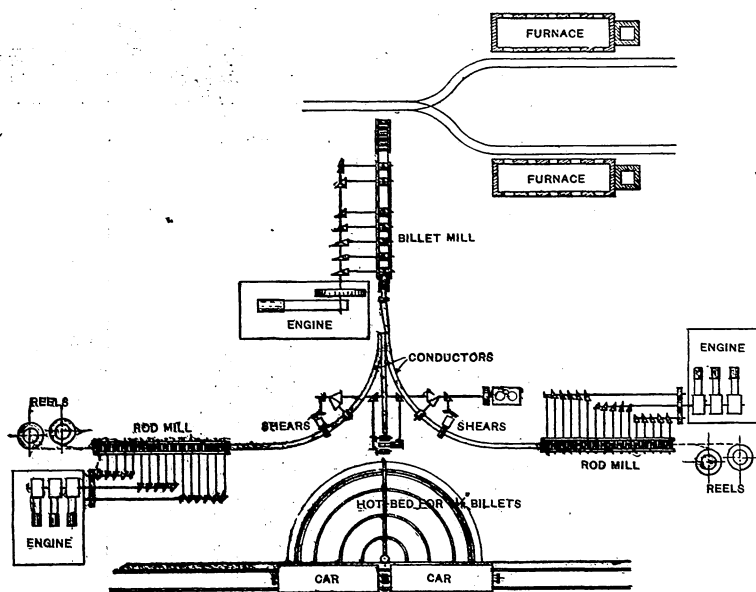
The F. H. Daniels Wire-Rod Rolling Mill.
